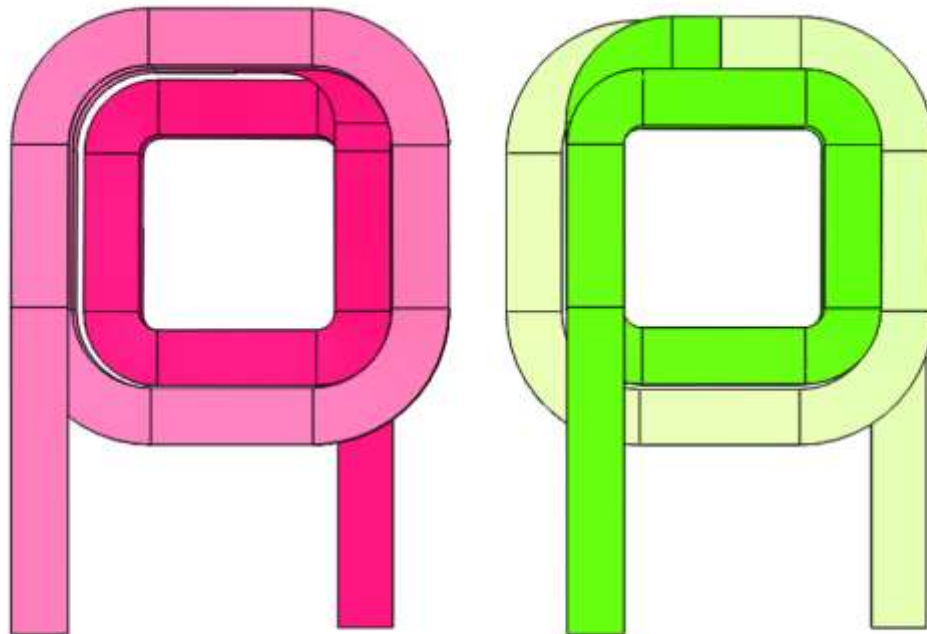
The two (identical) constituent winding parts of the winding arrangement with the darker colour showing the part of the winding with smaller periphery
